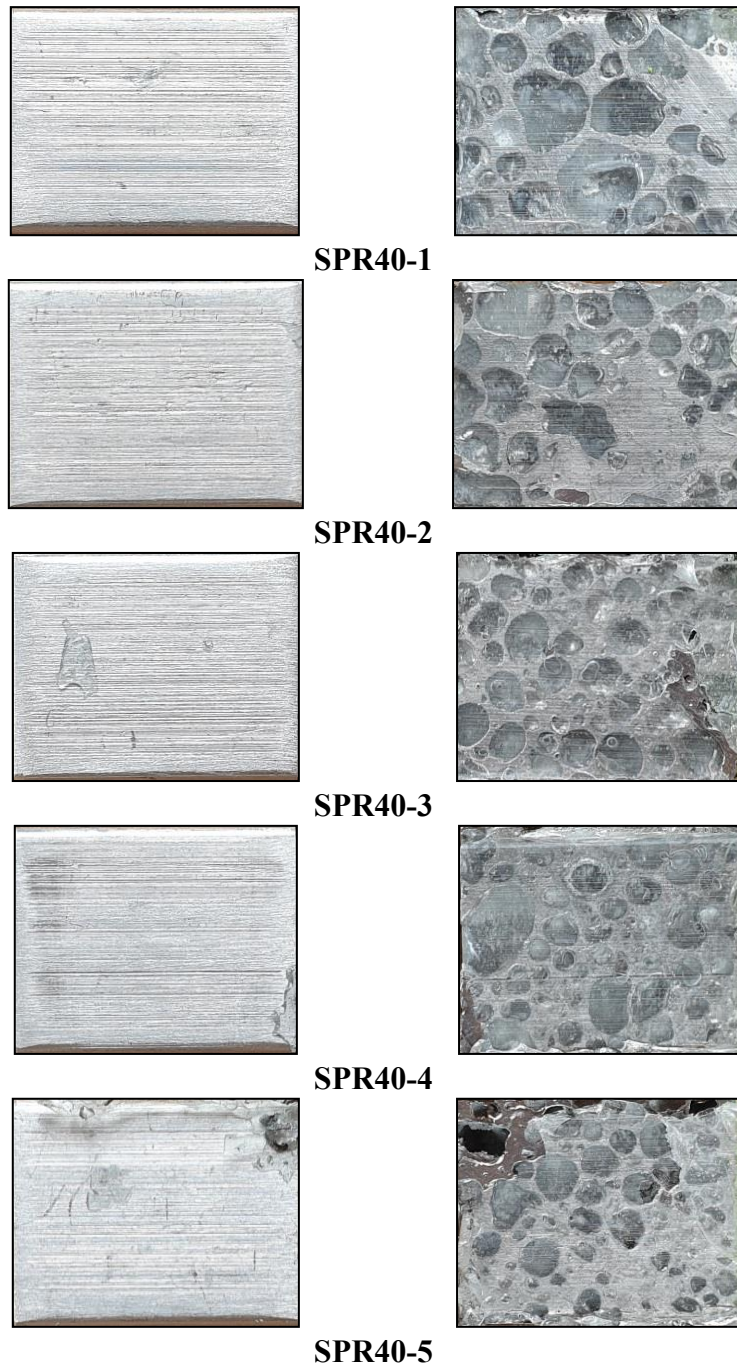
Bonding Surfaces of Aluminium Block and Specimens with Surface Porosity <40% (SPR40) after Shear Test.
